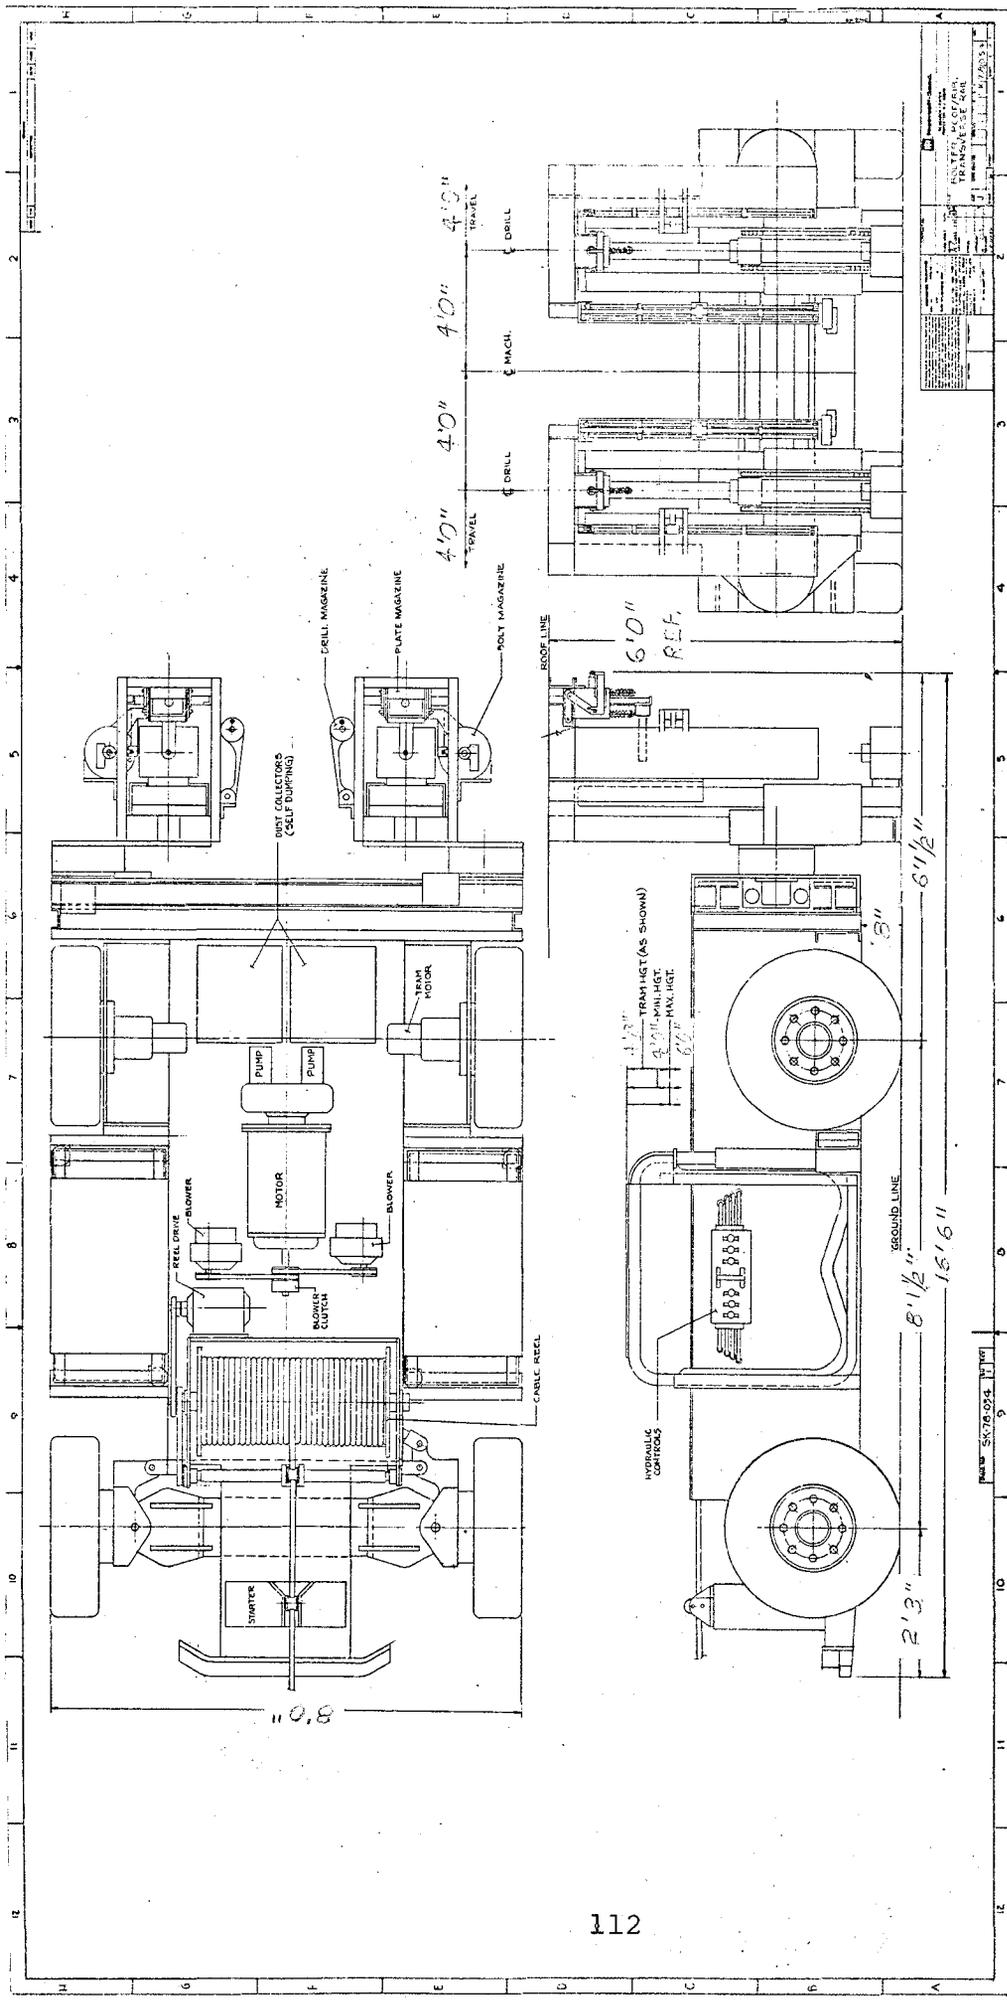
Plan and Elevation Views of the Transverse Rail Rib Bolter
